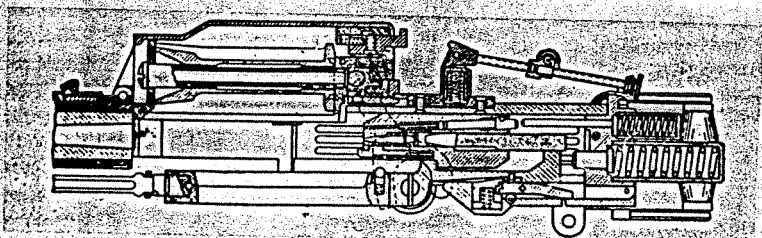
Parts and mechanisms of the machine gun in the rear position
